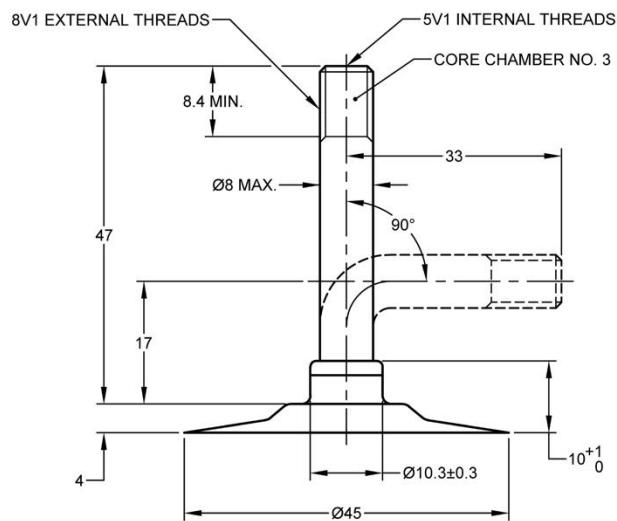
TUBELESS CLAMP-IN PASSENGER CAR VALVES
